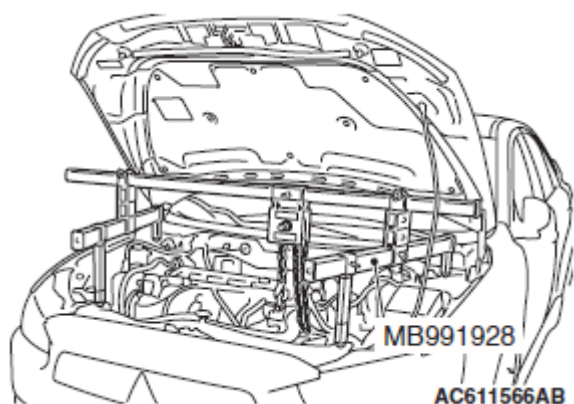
Supporting Engine Assembly Using Special Tool MB991928
